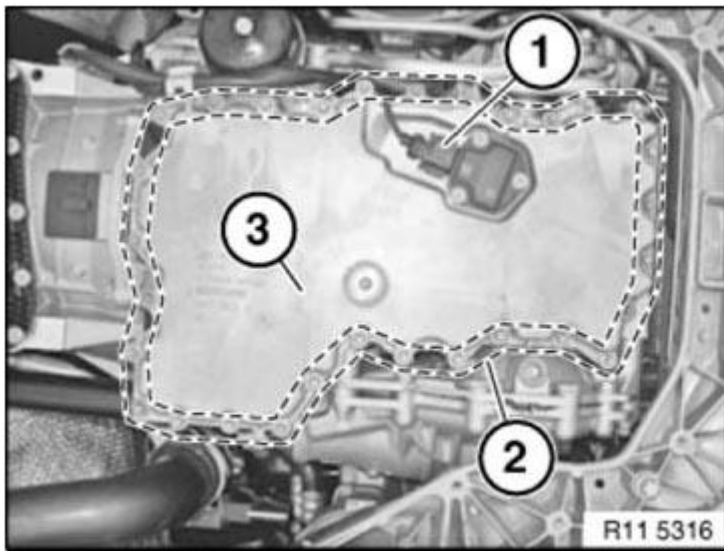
Identifying Plug Connection On Oil Level Sensor And Lower Oil Sump Section
